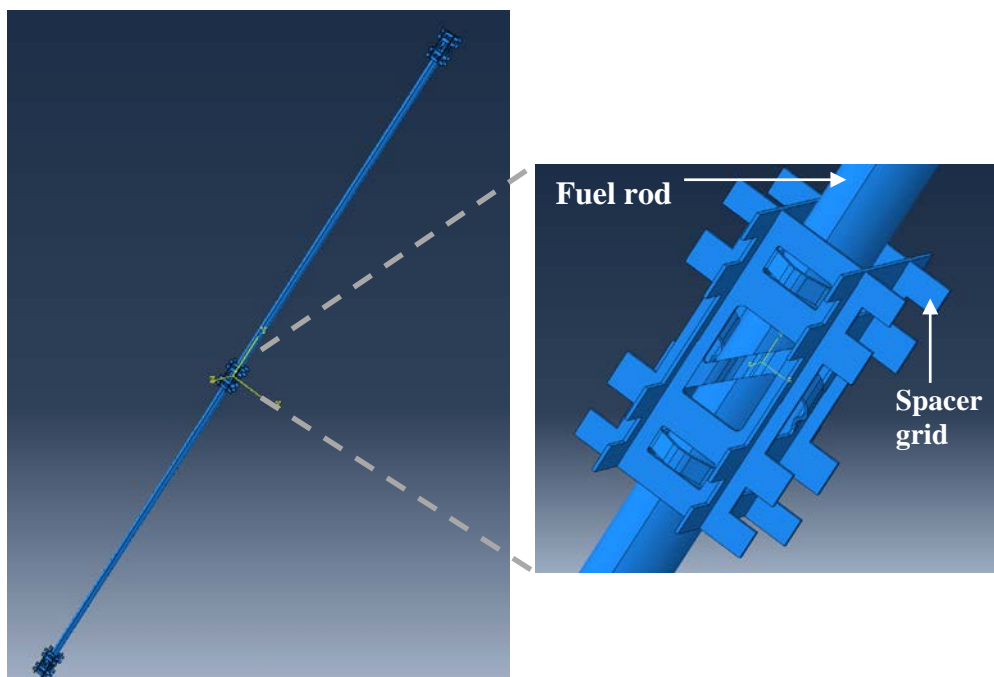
Schematic illustration of a section of a fuel rod, with detailed view of spacer grid geometry.
